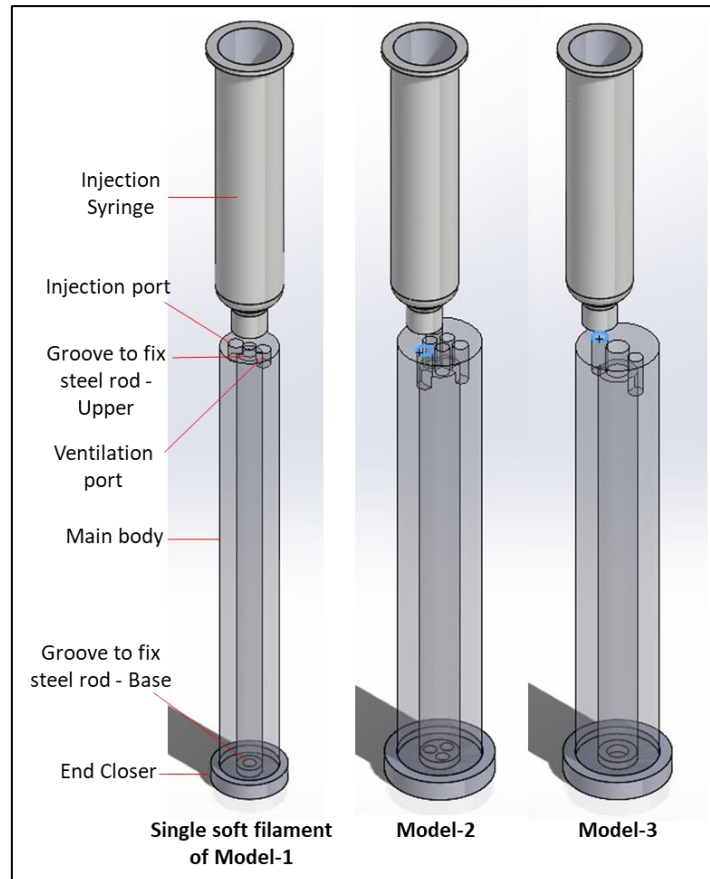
The 3D CAD model of the moulds for fabricating a single soft filament of Model-1, the soft component of Model-2, and the soft component of Model-3.
